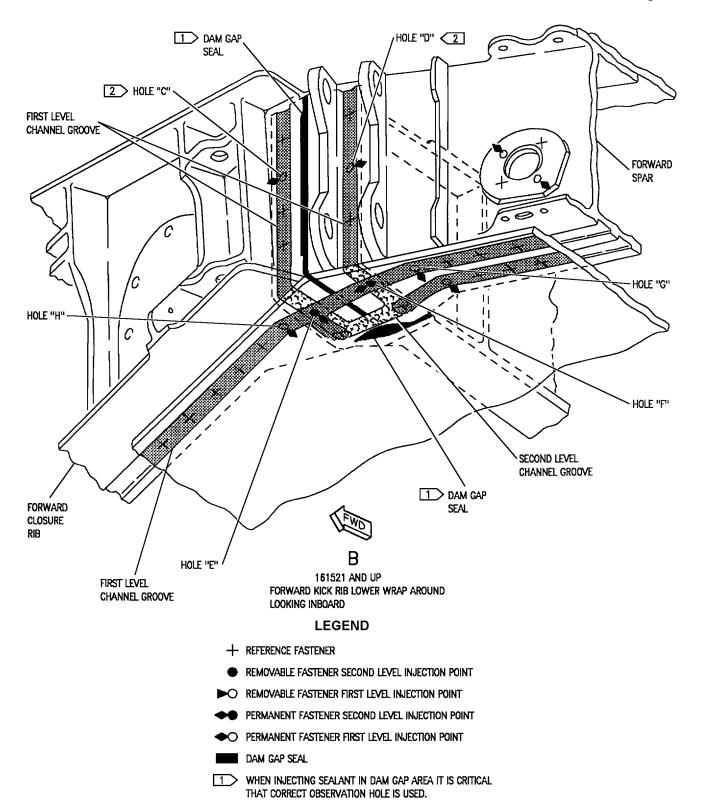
Kick Rib Channel Groove Seal Injection (Sheet 3)
